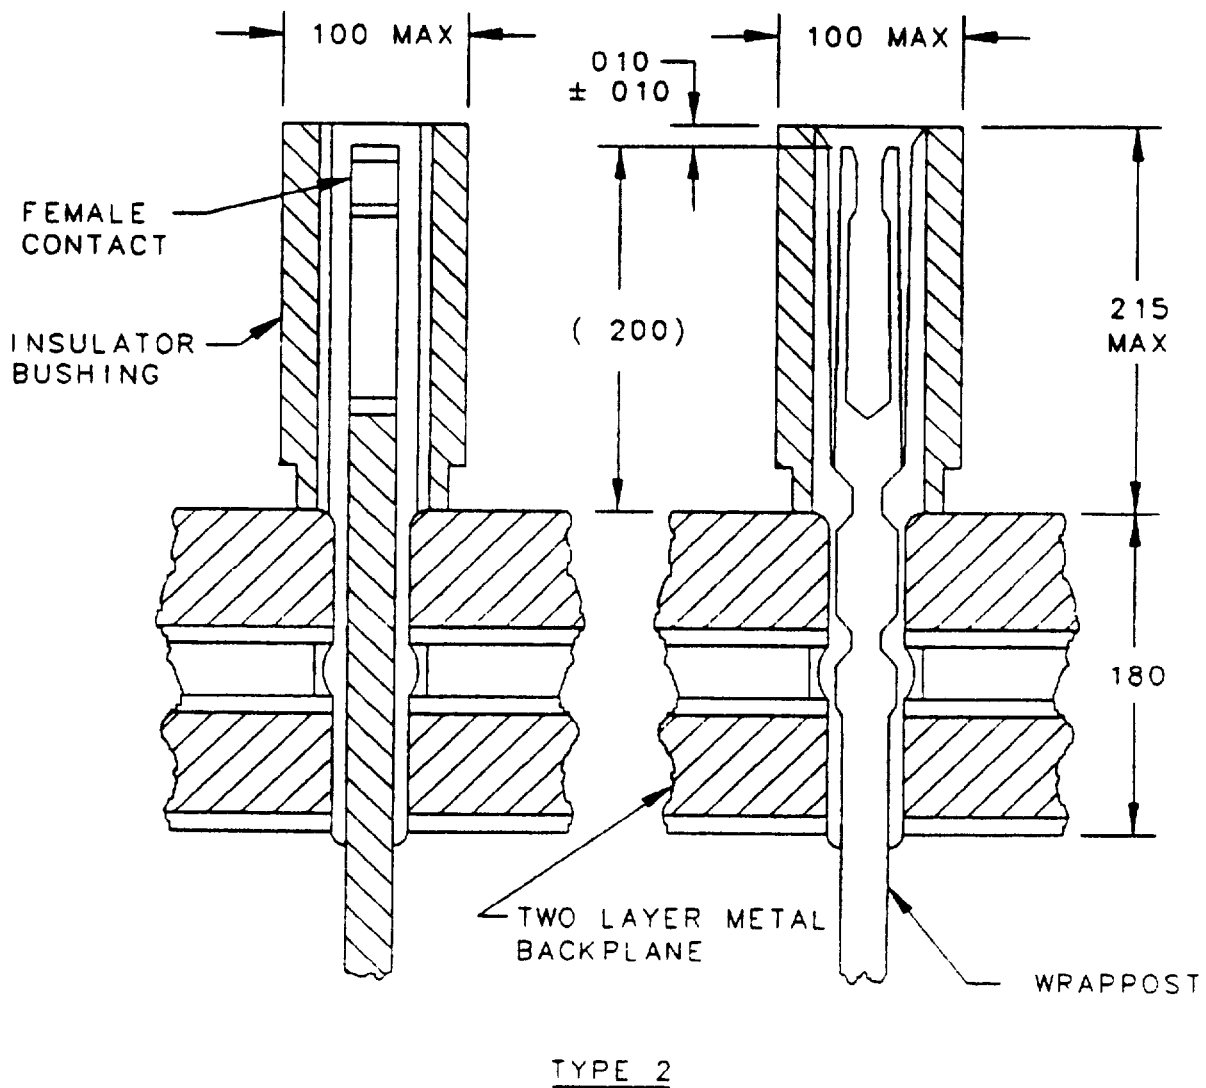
Cross sectional view of a metal backplane assembly - Continued.
